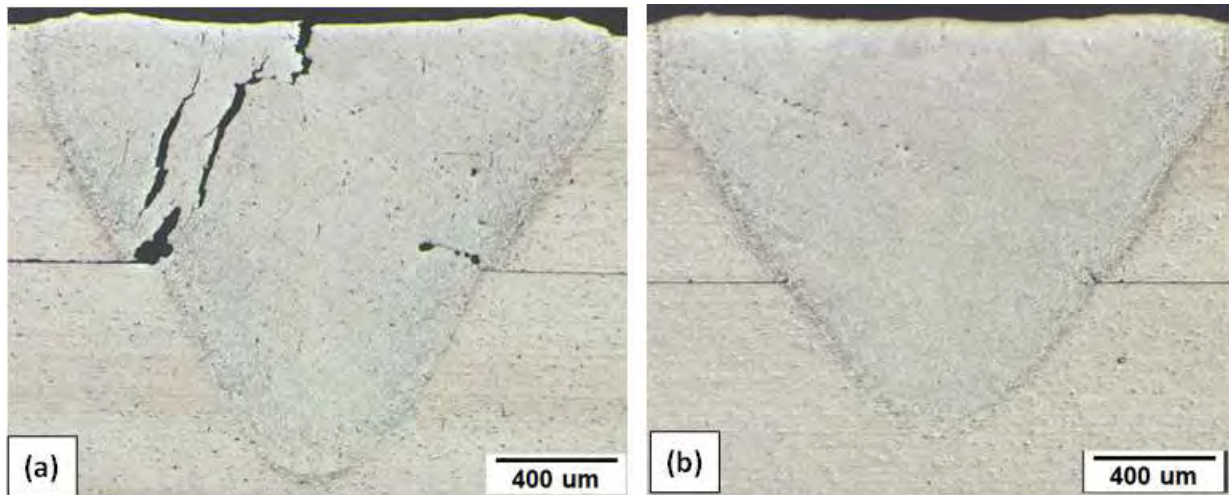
Solidification cracking in initial efforts (a) was eliminated by changing weld placement and parameters (b).
